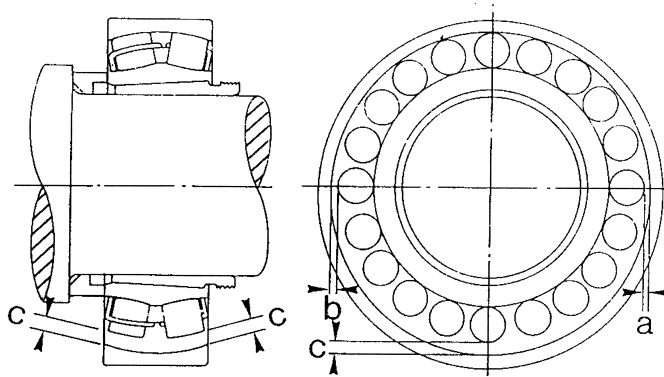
C Measuring Clearance of Large Size Spherical Roller Bearings
